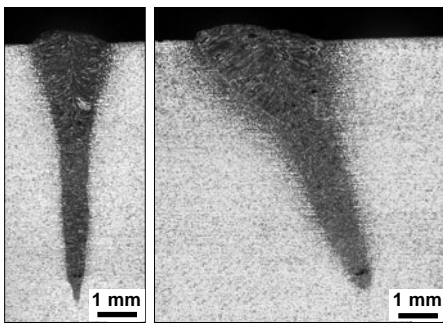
Two examples for welds in different regions of the working area. The penetration depth is almost the same, but the welding depth is different.
